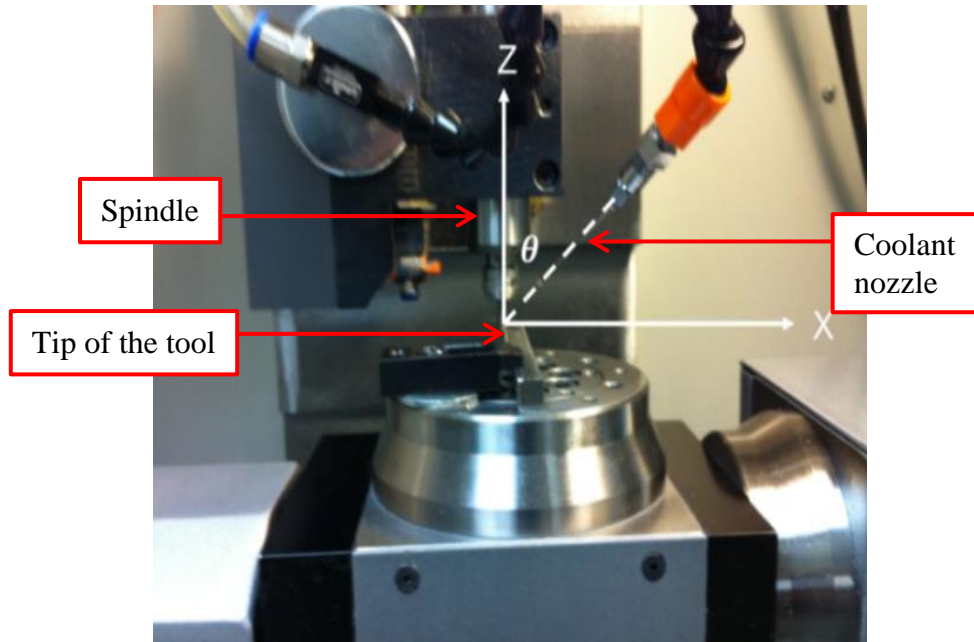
Coolant Nozzle Positioning (Front View) [6].
